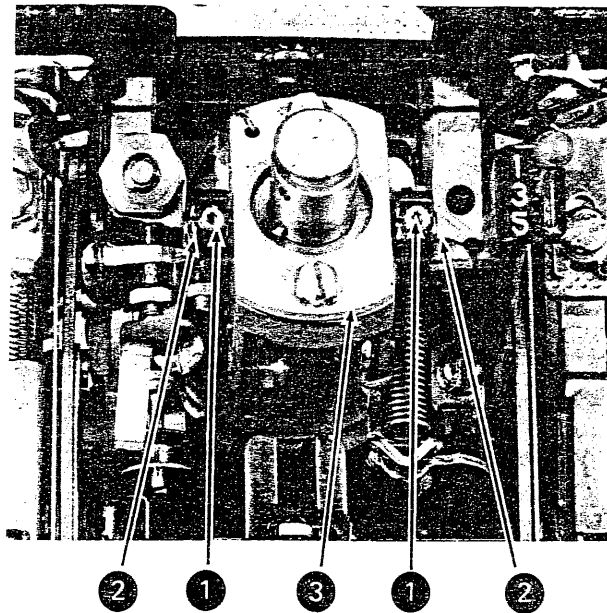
Lower-Ball-Socket and Tilt-Ring Removal (Steps 1-8)
